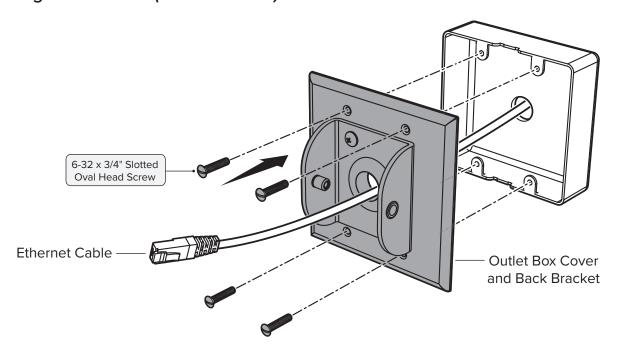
4 x 4 in. (102 x 102 mm) Outlet Box
